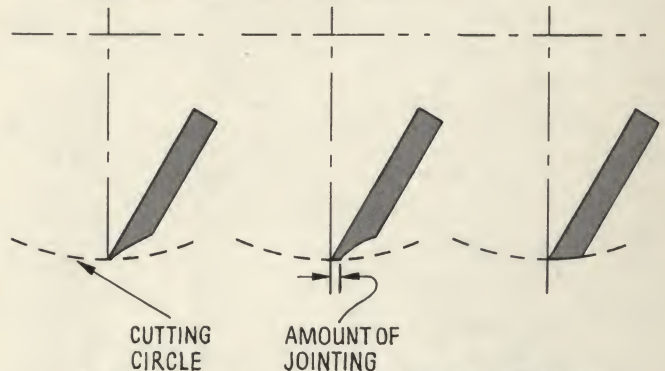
Effect of jointing. Unjointed knife (left), proper jointing (center), excessive jointing (right)
